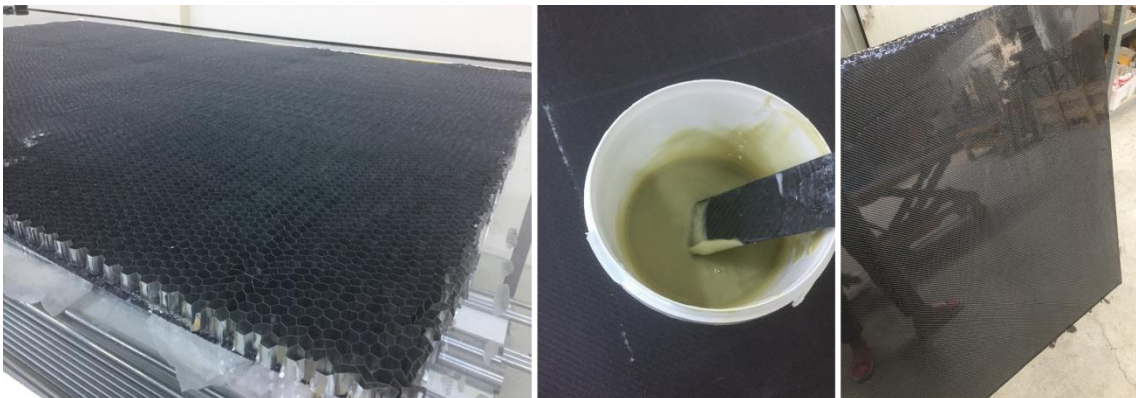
Bonding face sheets with aluminum honeycomb core
